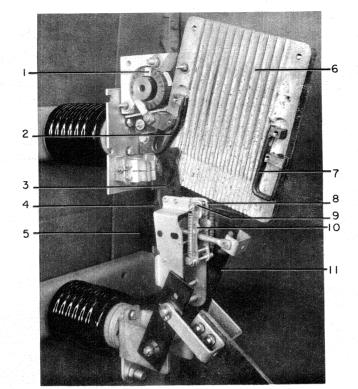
Cutaway View of SE-9 Switch Shown in Latched Position
